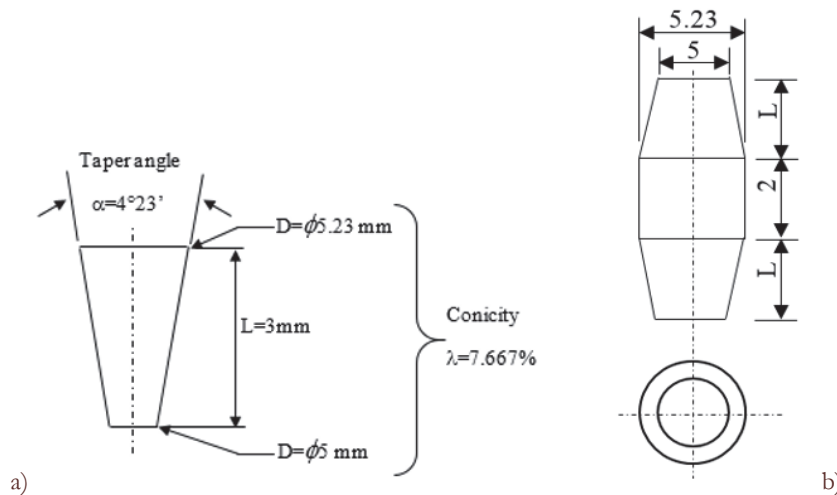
Geometry definition of the tapered pin: a) Taper Details of the conical part of the pin mandrel, Case of $L = 3$ mm; b) Geometry and dimensions of the tapered pin.
